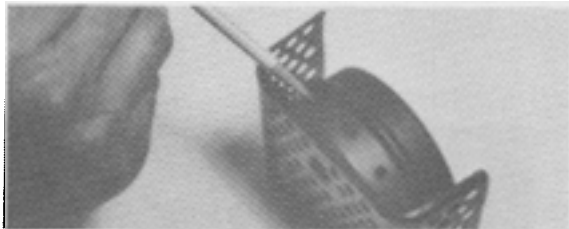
Exhaust exit holes in muffler should be free from carbon build-up. Suggest to use small wire to clean this area when necessary.
